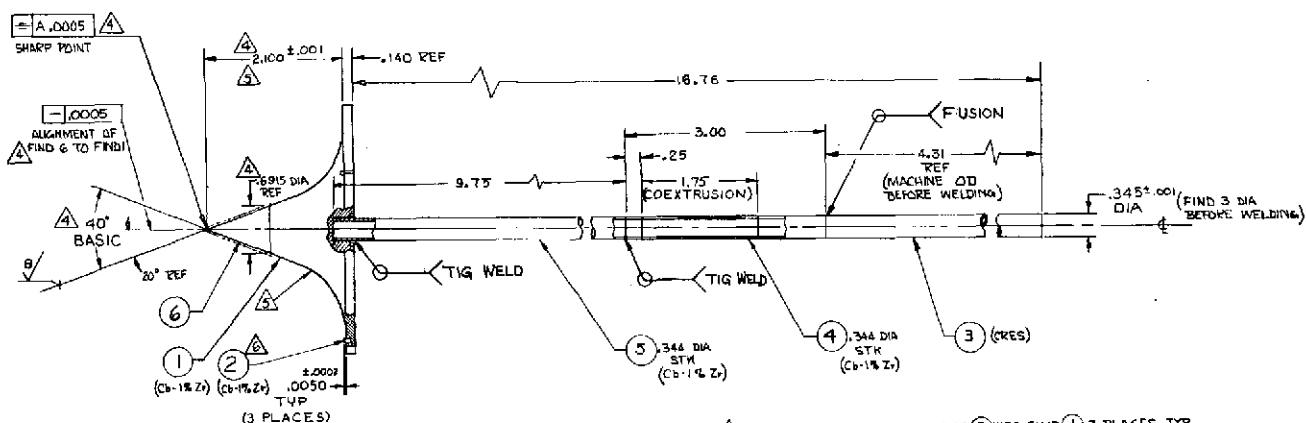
Assembly, cone and support, separator - 100-kW erosion loop
